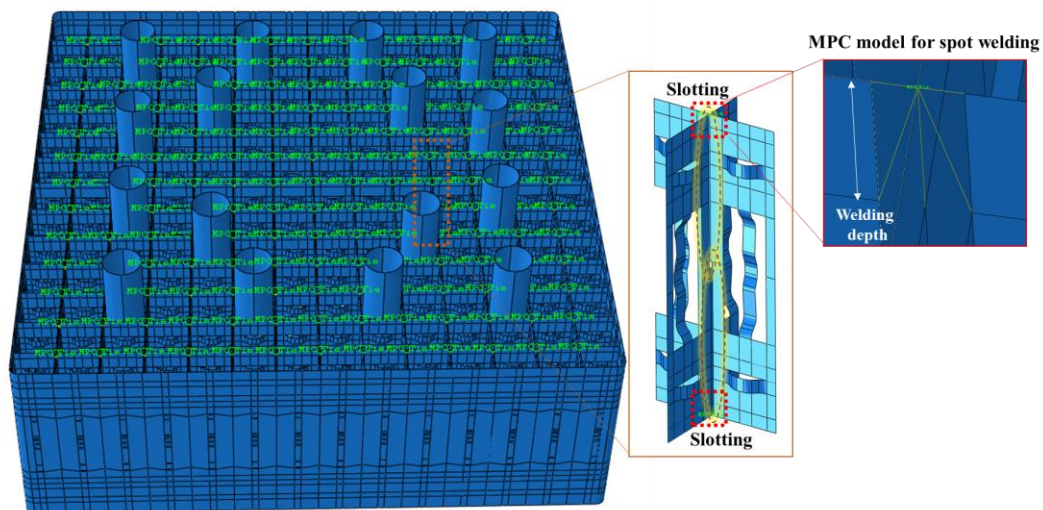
MPC model for spot welding in mid spacer grid
